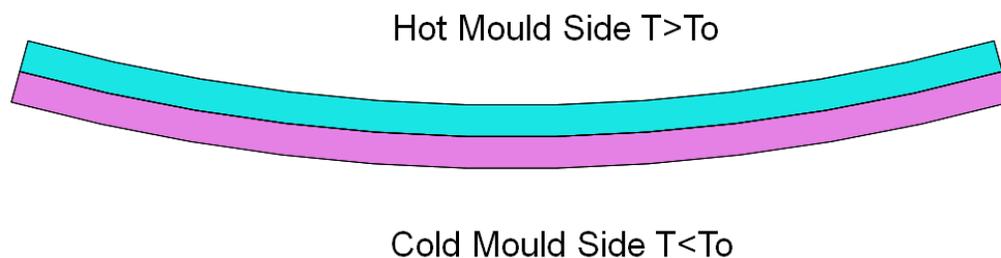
Warpage of injection moulded part due to differences in mould wall temperature.
